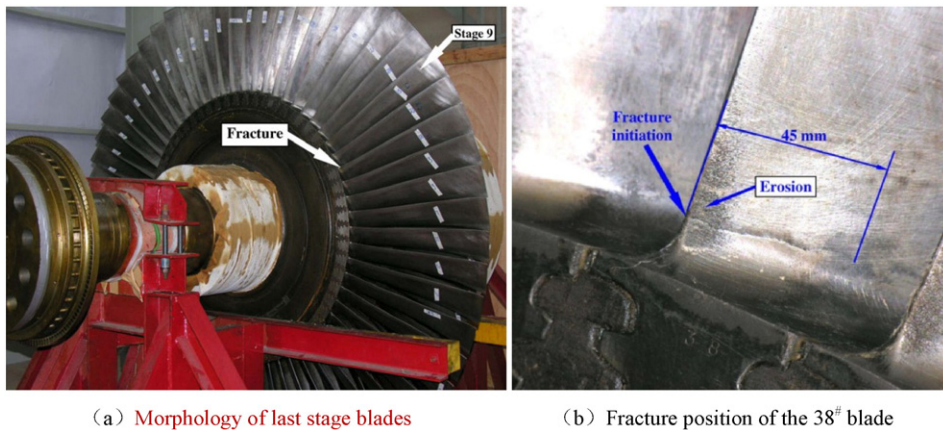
Morphology of last stage blades and fracture position of the blade [59].
